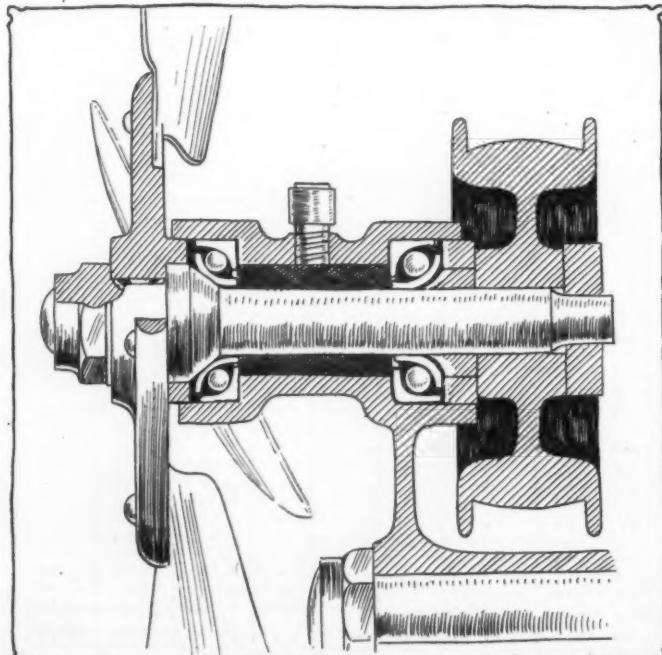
Balanced fan drive; pulley and fan on opposite sides of bearing
